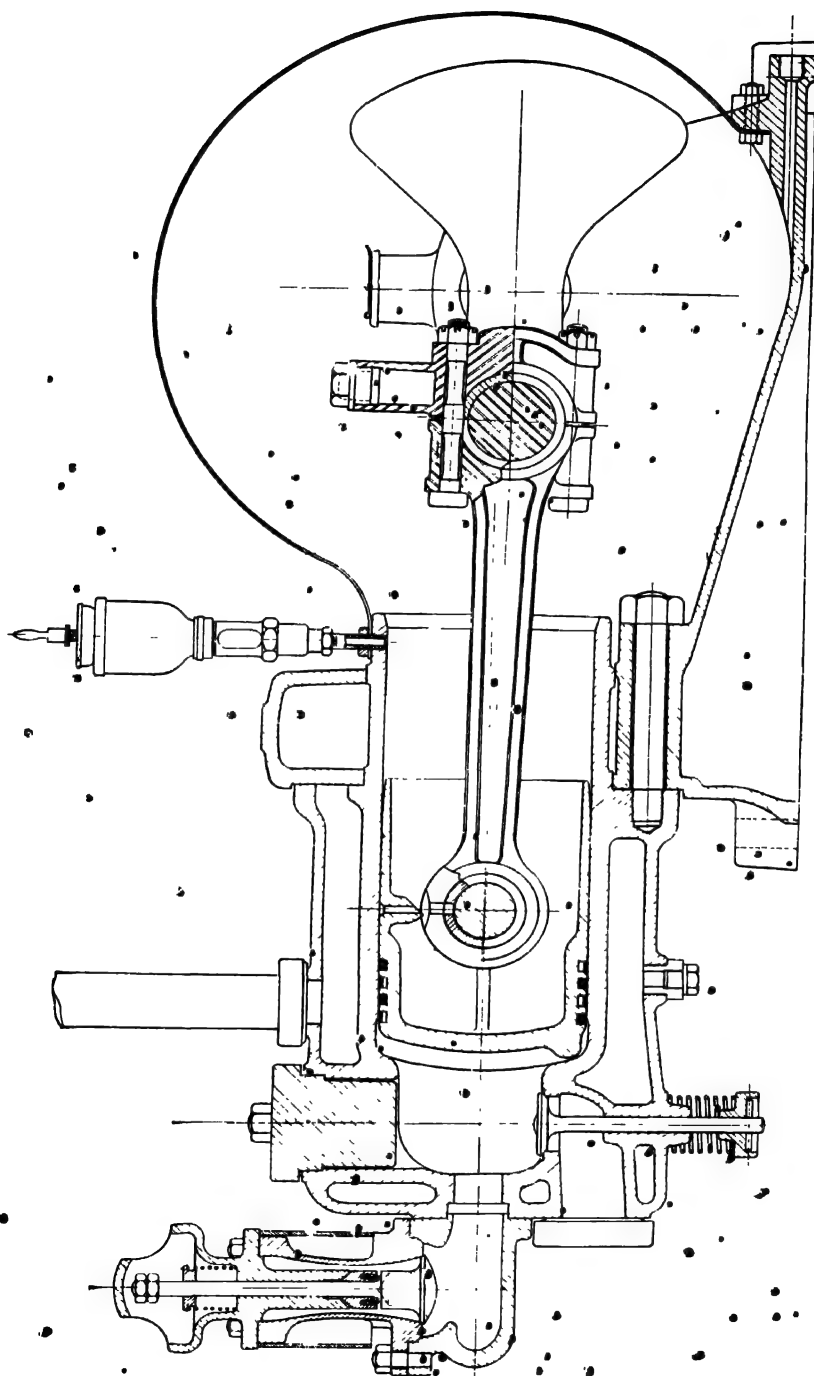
Sectional Arrangement of Ruston-Proctor Engine
